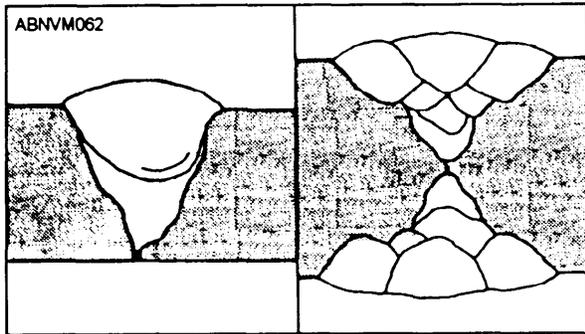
Gross section of two welds showing poor root fusion and too heavy a root face.
